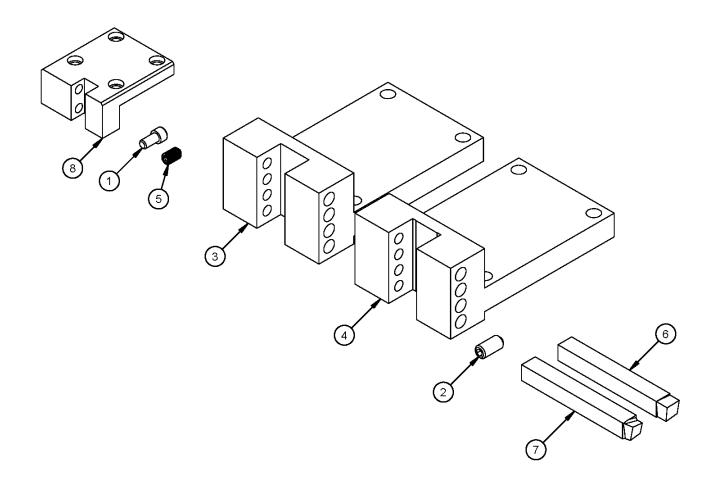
ADJUSTABLE AXIAL NUT LEAD SCREW ASSEMBLY (P/N 54223)
